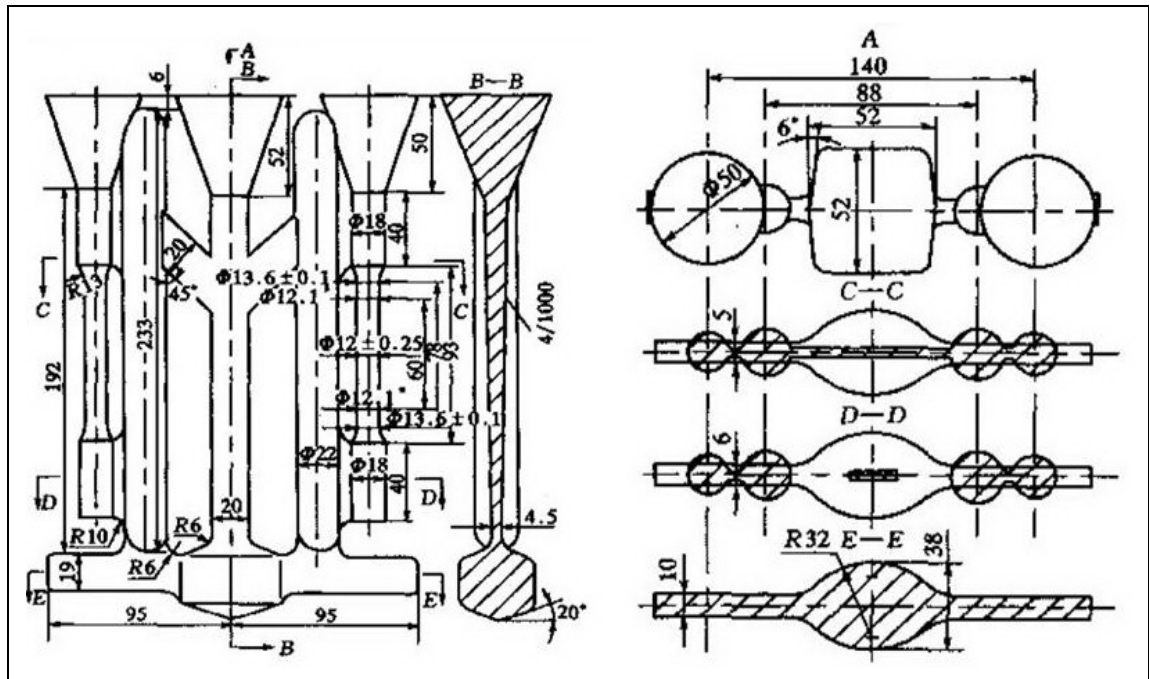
The detailed drawing of the circular tensile bar assembly (Zhao, 2006).
